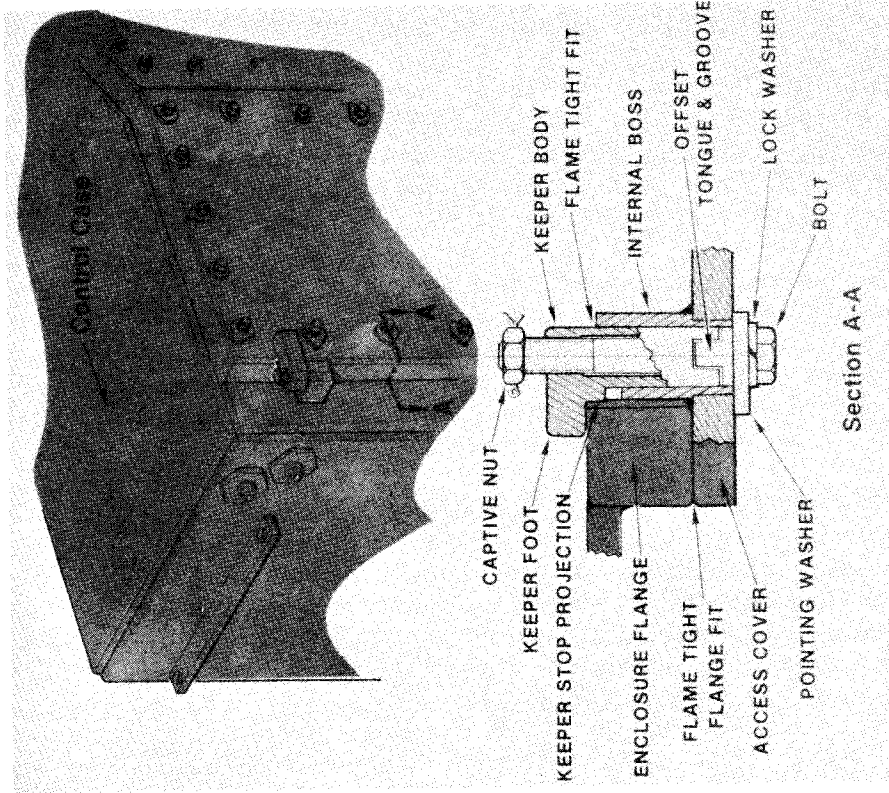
Internal rotary keeper for explosionproof enclosure covers.
